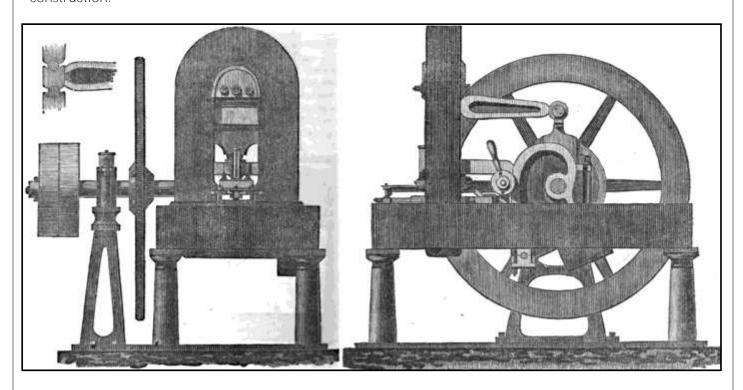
Left, front view of press showing the lever arm and knuckle-joint assembly in the upper left. Right, side view of press showing lever arm, driven by a crankshaft, which straightened the knuckle-joint at top, causing the strike.
